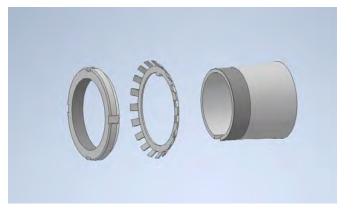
(Left to Right) Bearing Nut, Locking Washer, and Tapered Sleeve
